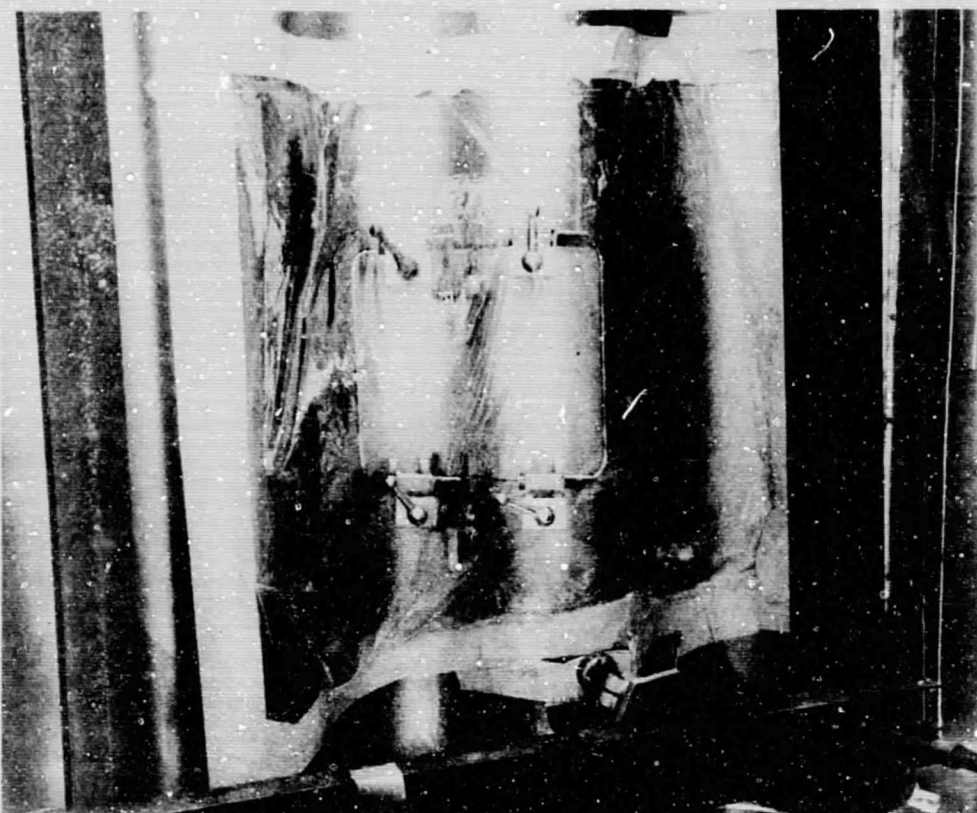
REPLACEMENT PANEL IN POSITION TO BE WELDED -
